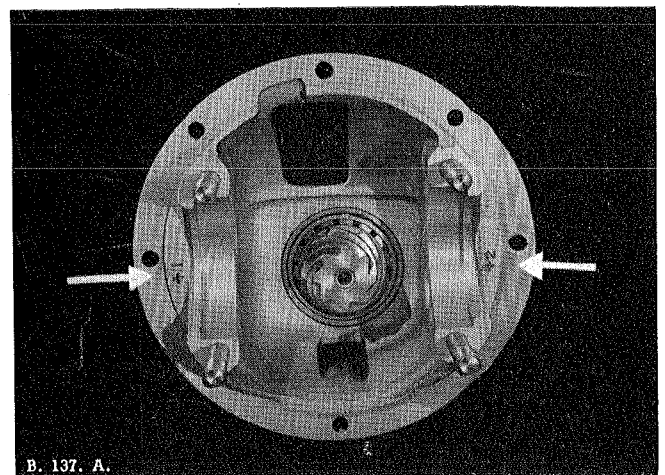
Illustrating the machining tolerances for the differential bearing housings as marked by the factory inspector.
